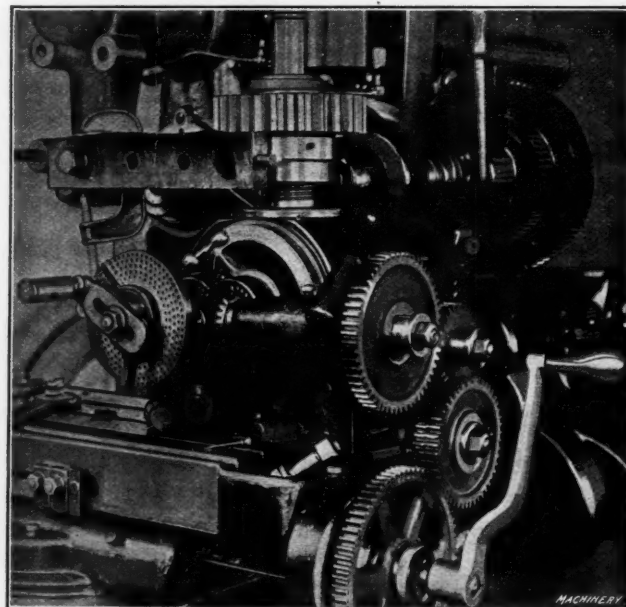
Milling Machine set up for laying out the Shape of a Hob Tooth
